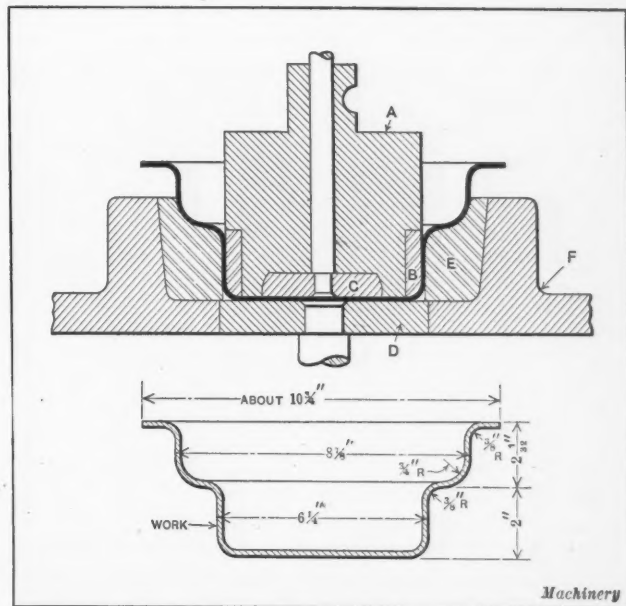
Die that is employed in lengthening the Shell and reducing the Diameter
